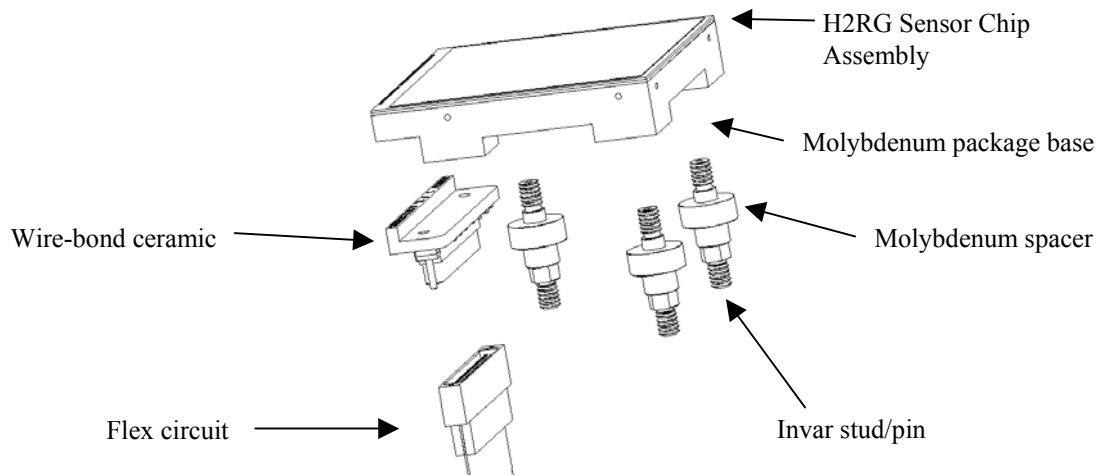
Exploded view of a H2RG NGST non-ASIC detector package.
